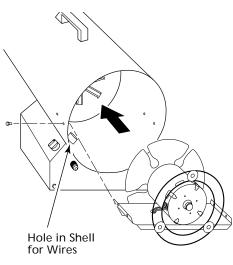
Replacing Motor, Motor Mount, and Fan Guard into Heater
